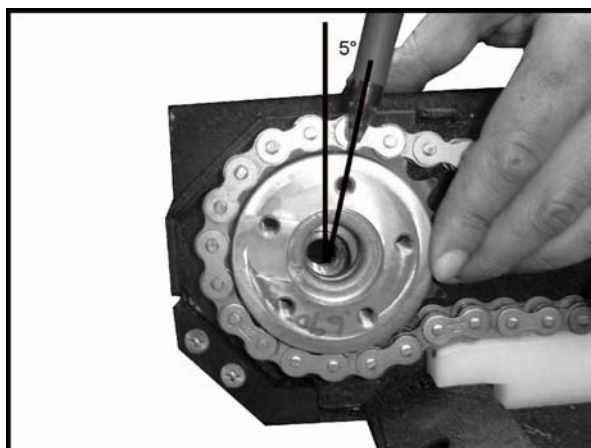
and 2-13: LARGE SPROCKET ALIGNMENT (LH SIDE SHOWN)
